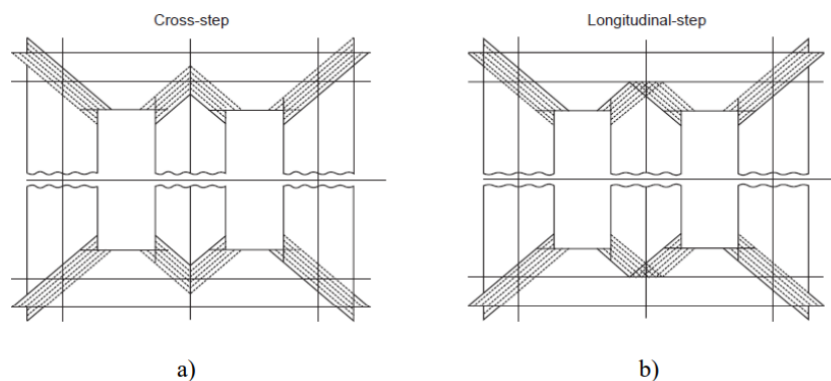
The mitred joint constructions (a) Cross-step construction (b) Longitudinal step construction [26]
